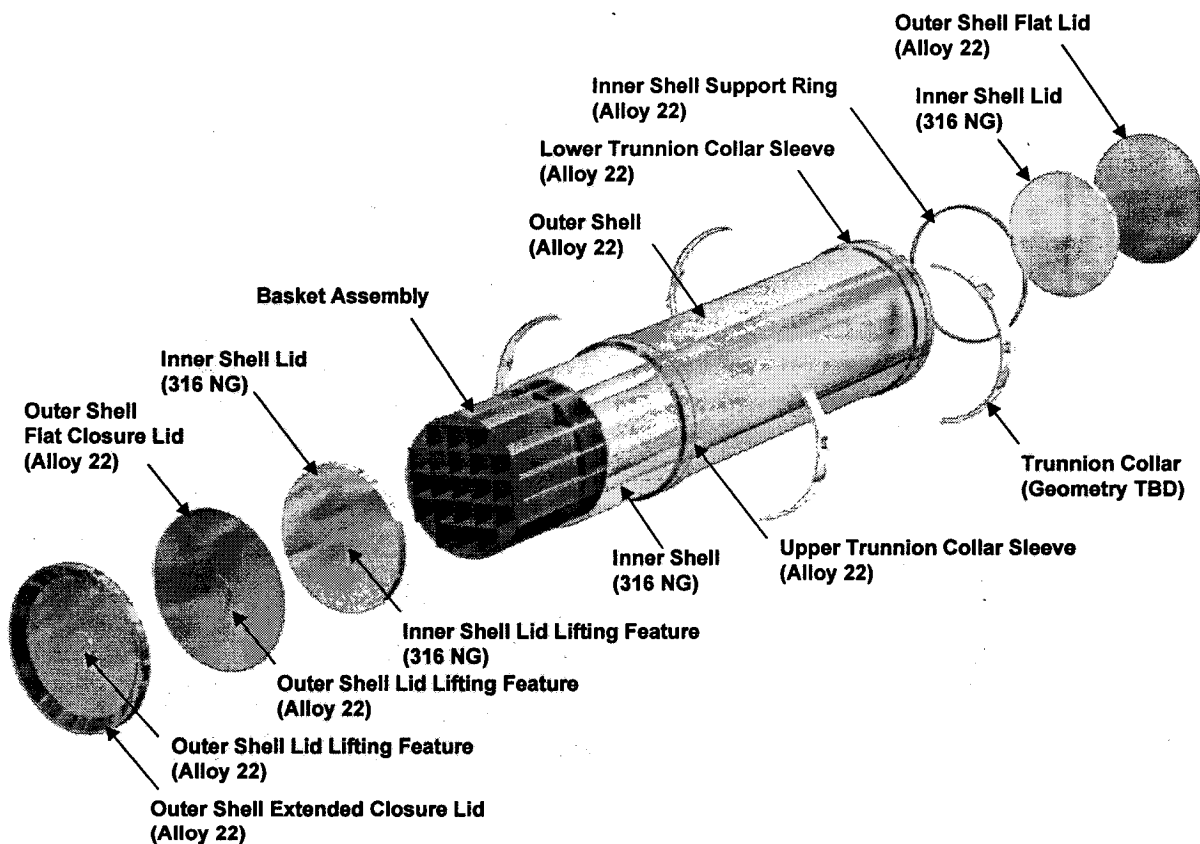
21-PWR Waste Package Assembly Configuration
